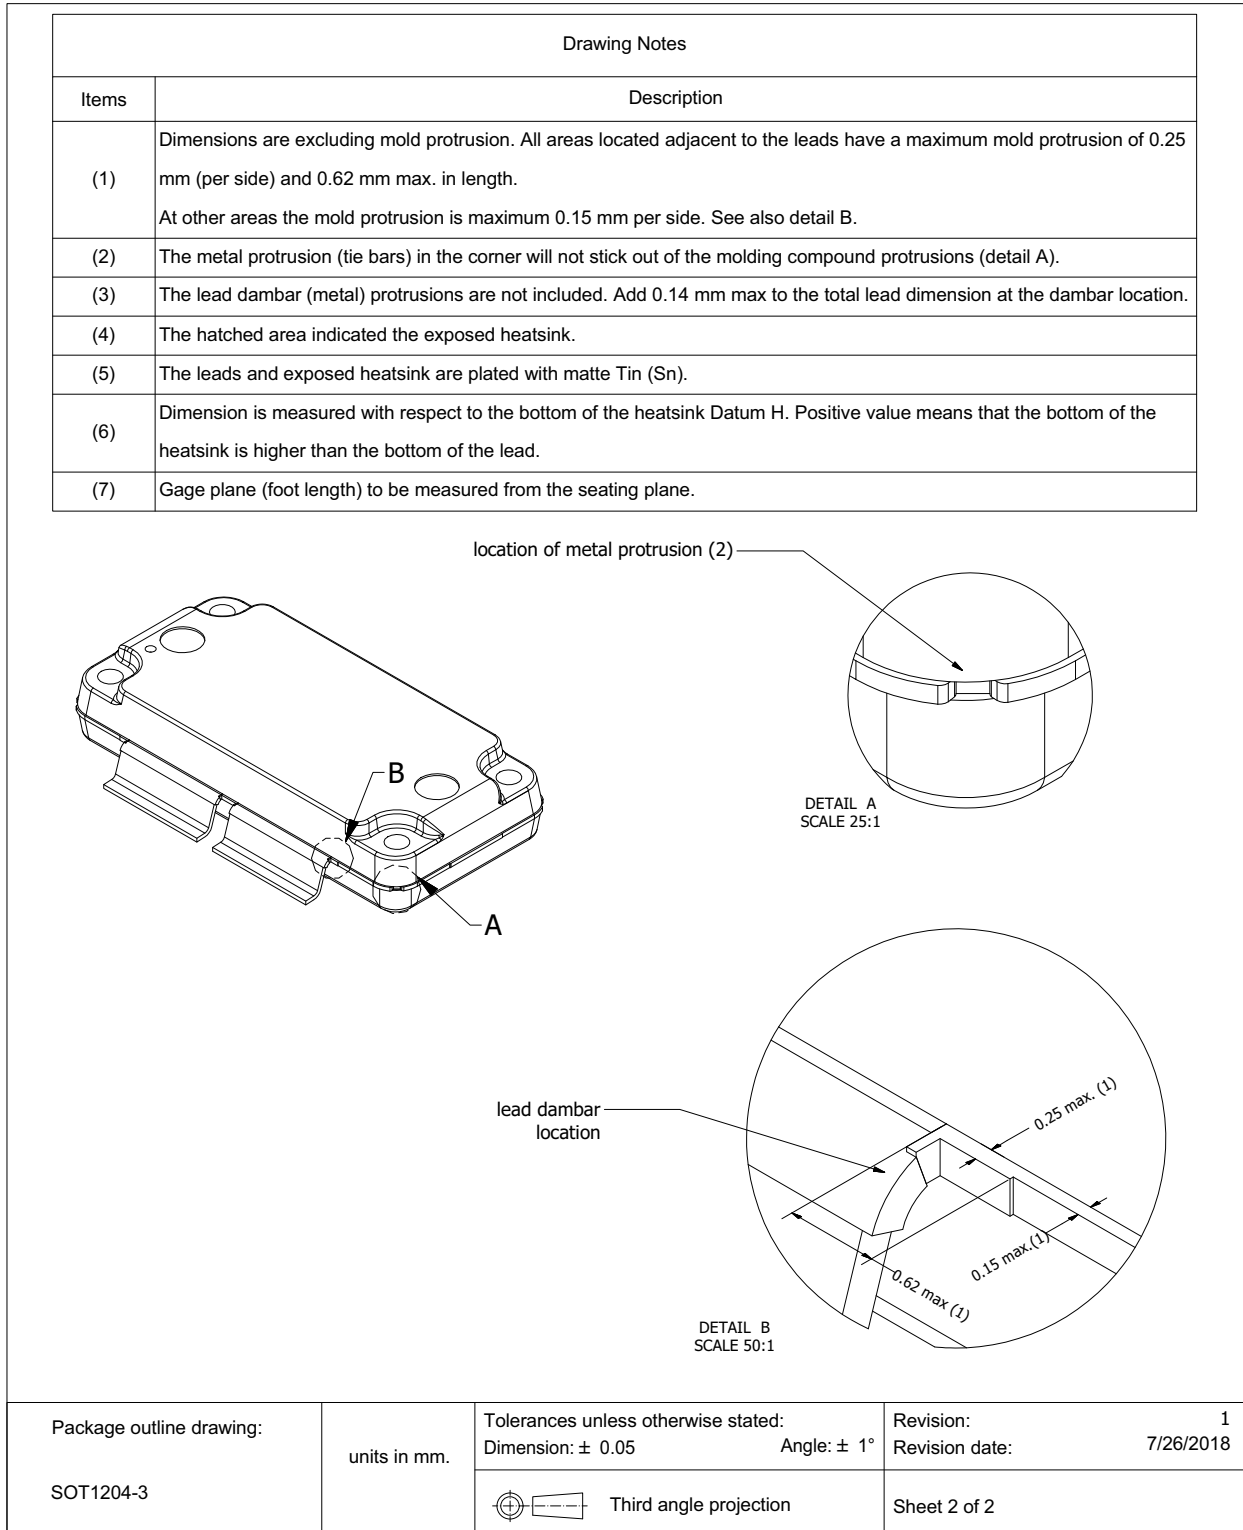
Package outline SOT1204-3 (sheet 2 of 2)
